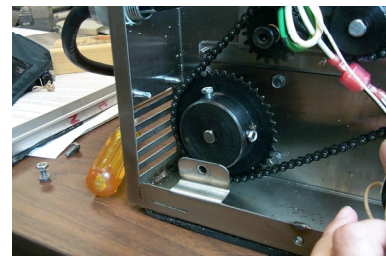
Two bolts hold the drive sprocket on the motor's drive shaft. When the sprocket is removed, the four machine bolts that hold the motor in place are accessible.
